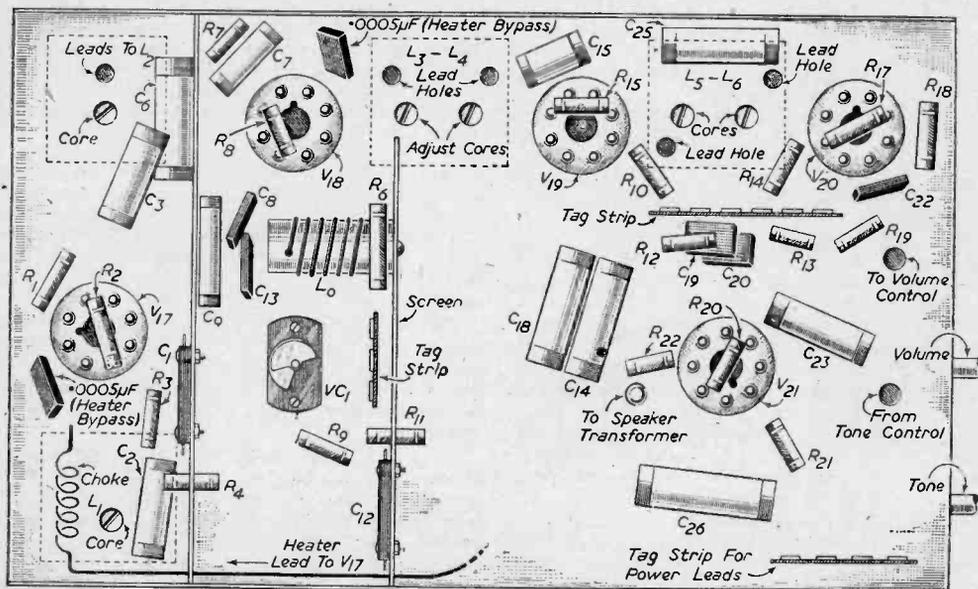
Layout for the sound receiver. R11 and R4 pass through the screens, as shown. Above the chassis are VR1, VR2, C21, R16, C24, C27 and the O/P transformer. VR1 must be completely insulated from the chassis.
